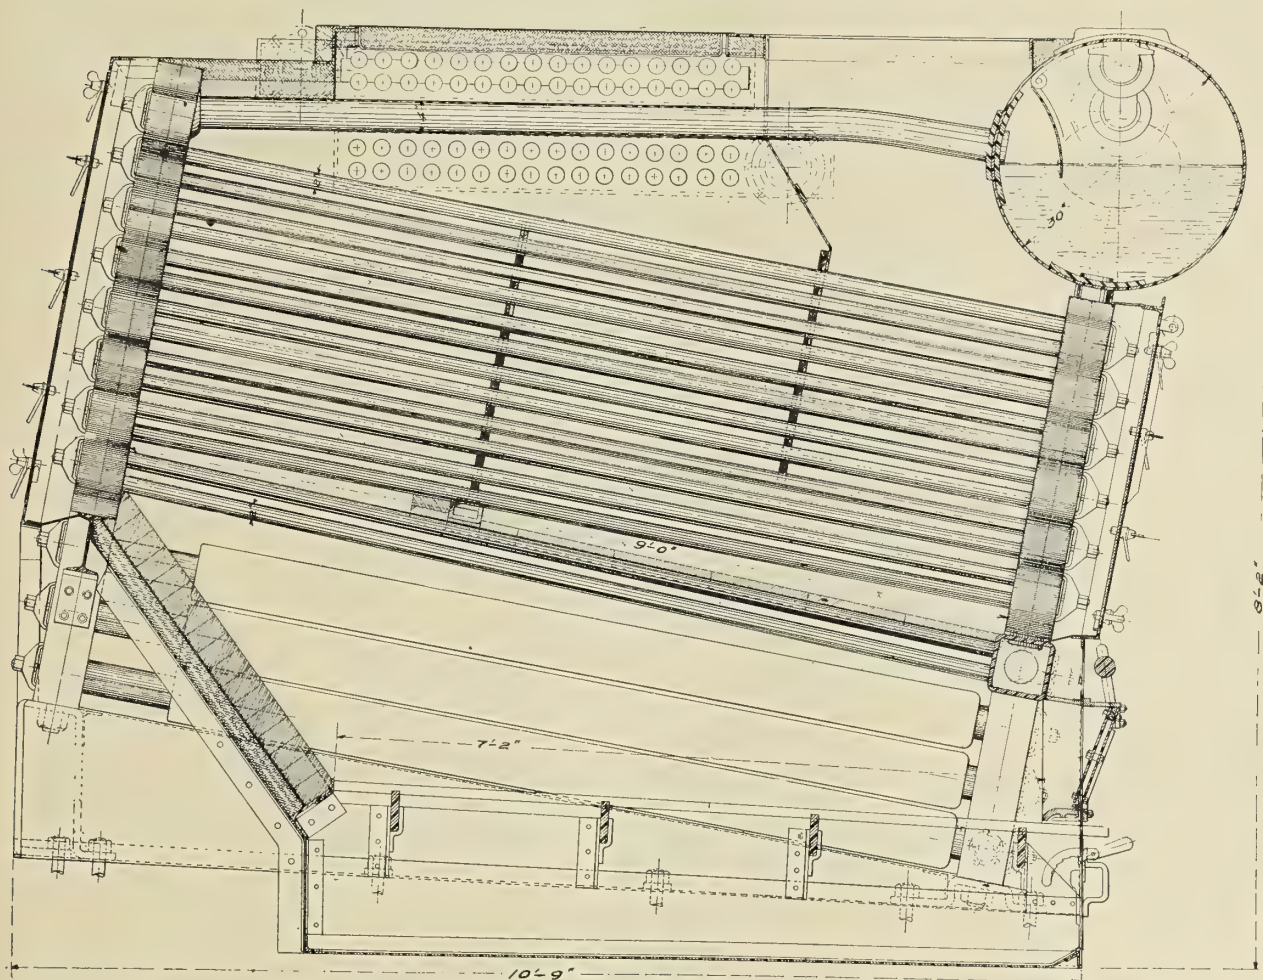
LONGITUDINAL SECTION THROUGH BOILER, SHOWING LOCATION OF SUPERHEATER ABOVE EVAPORATING TUBES.
